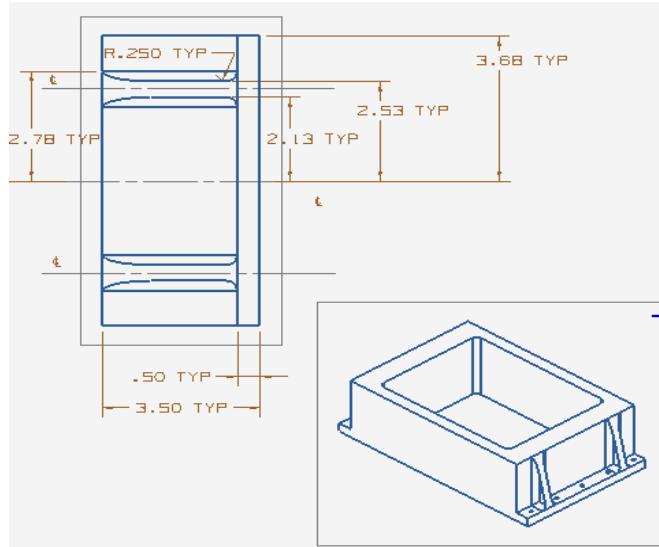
Side and Isometric Draft Views of the Prototype Mass Model
